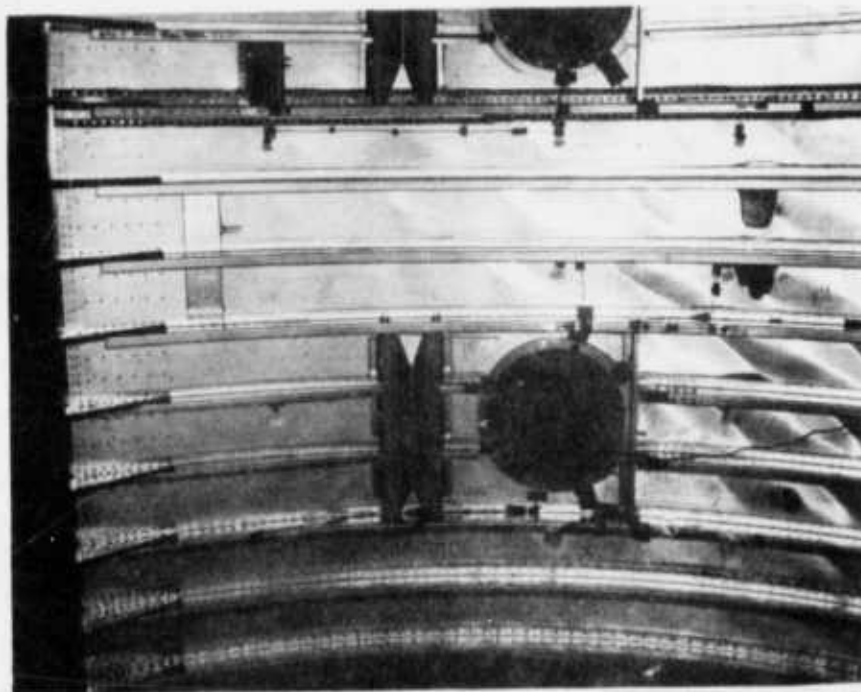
INSIDE VIEW OF WELDBONDED TEST COMPONENT AFTER STATIC TEST
